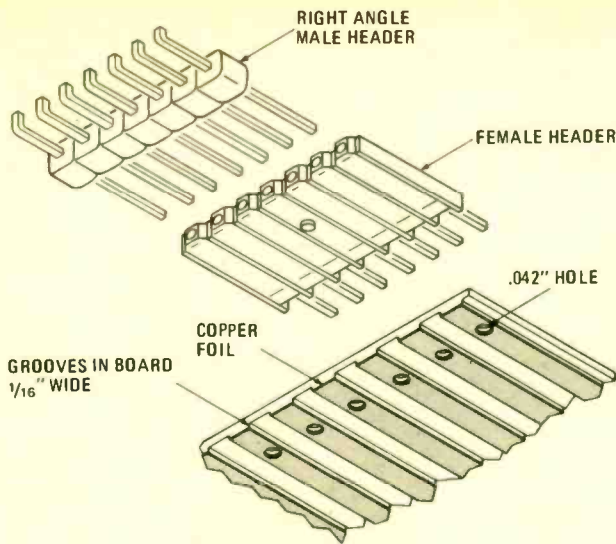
HEADERS FORM CONNECTORS as auxiliary boards are plugged into the motherboard or main-frame.
